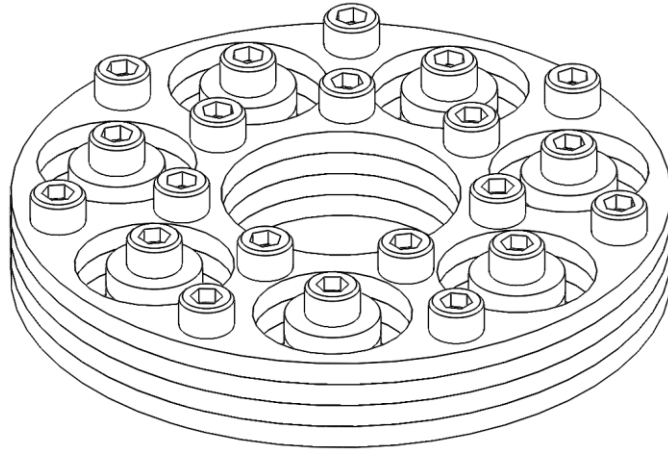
CAD rendering of ring mold for mechanical and distension testing samples
